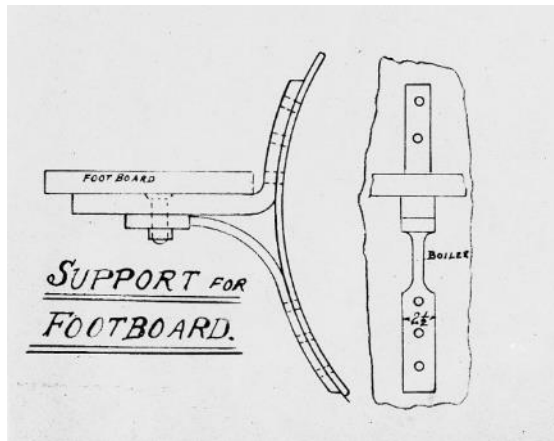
Part of the 1906 Darlington Works apprentice drawing showing cross-section and elevation views of running-board brackets.
